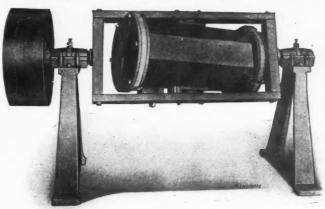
Abbott Burnishing Barrel clamped at an Angle in Yoke
